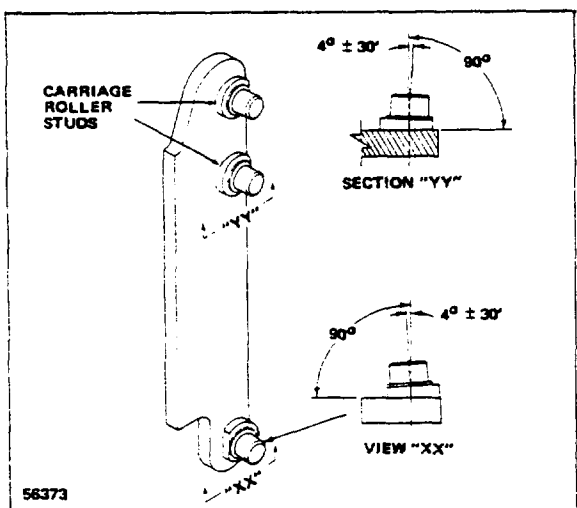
Carriage Roller Stud Location (Canted Roller Type) 3,000-5,500 lb W/40 Canted Studs
